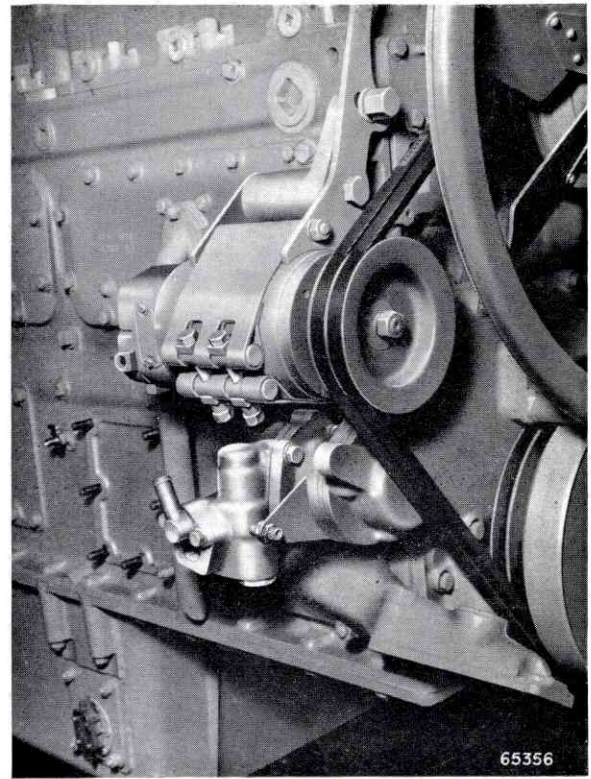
VIEW OF THE STEERING GEAR PUMP
